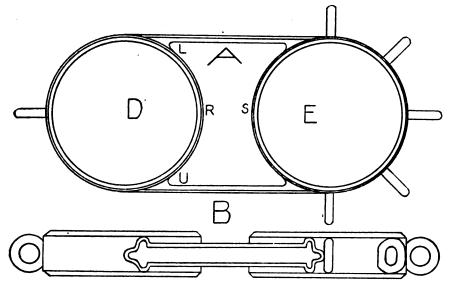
SHOWING A TOP AND A SIDE VIEW OF FINISHED BAND.
